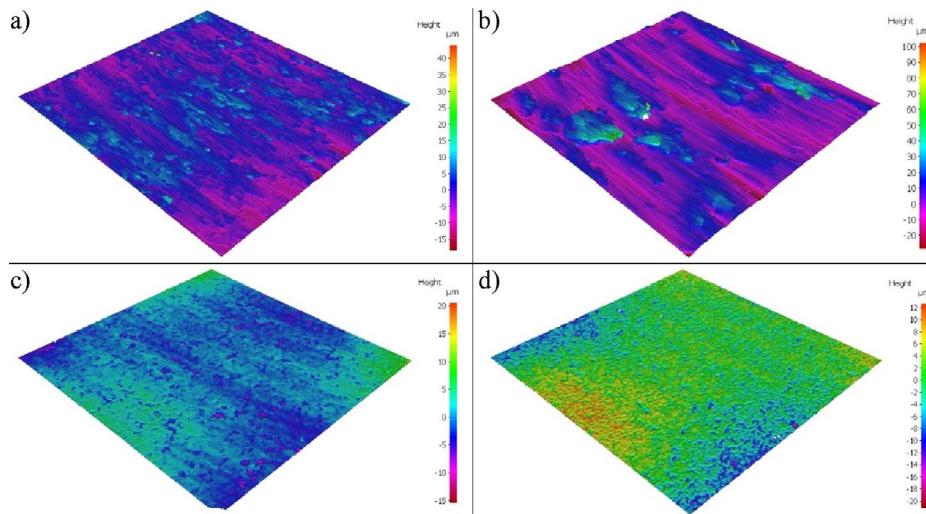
Topography of the inner surface of drawpieces made with a tool with a $\text{Al}_2\text{O}_3 + \text{SiC}(\text{w})$ tip: a) friction-based heating + rape-seed oil, b) friction-based heating + rape-seed oil + MoS_2 , c) oil-based heating + rape-seed oil and d) oil-based heating + MoS_2
